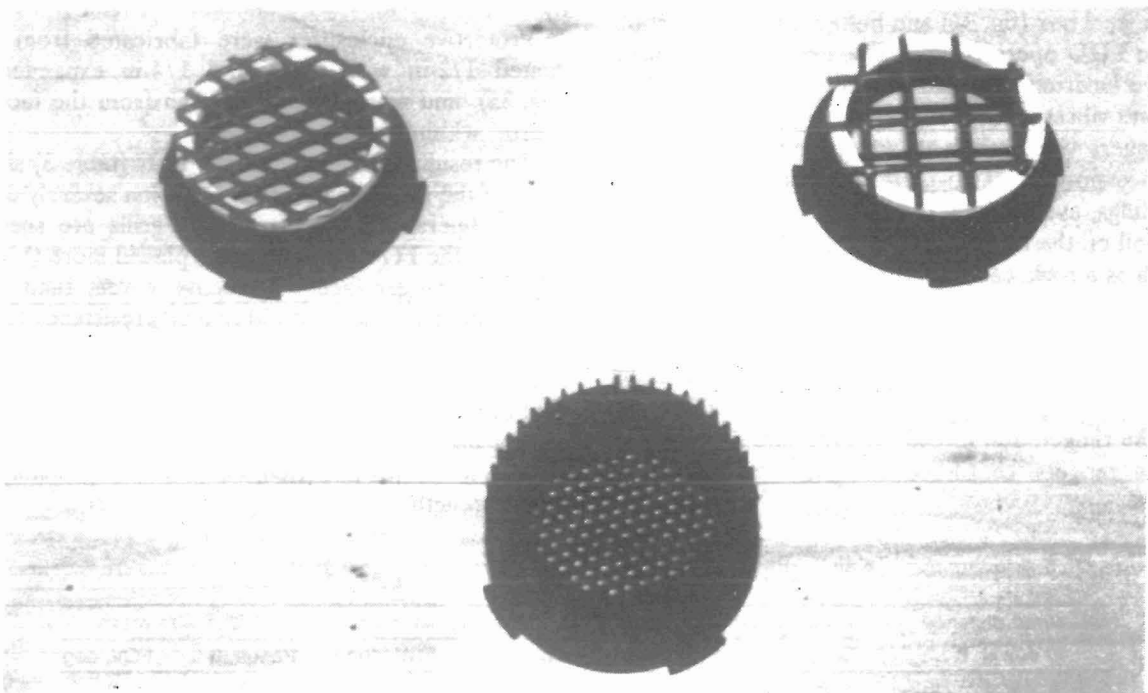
Protective faceplates for sensors (upper left = 1/4-in expanded metal, upper right = 1/2-in wire mesh, middle = Polaroid design).
